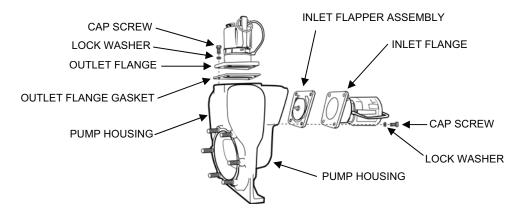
P-7/P8 Pump Inlet Flange Flapper Assembly and Outlet Flange Gasket Replacement.
